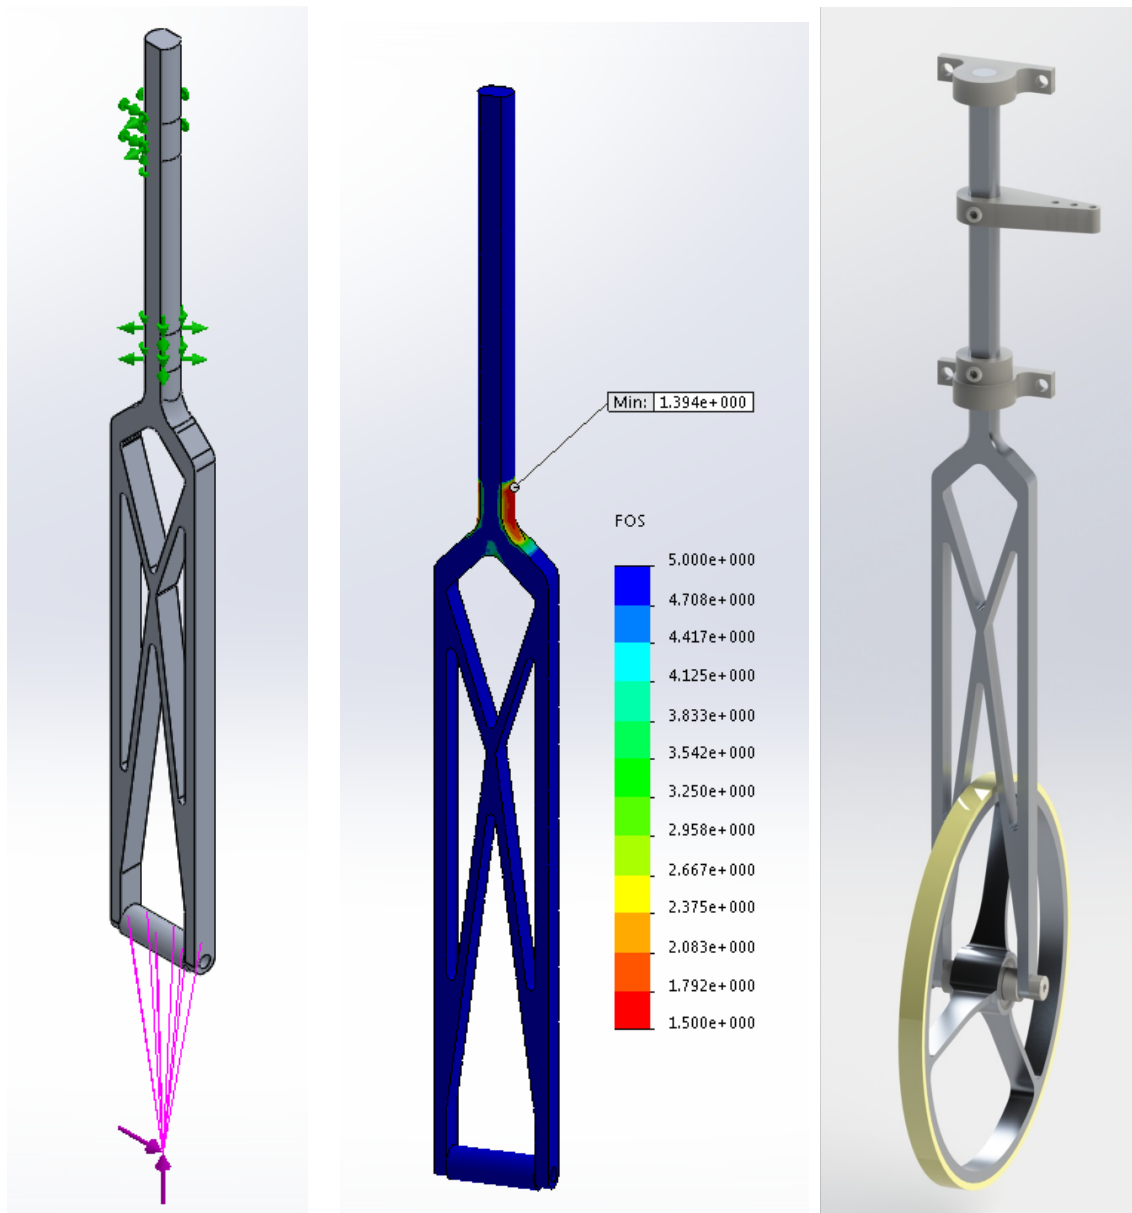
Welded aluminum solid link nose gear concepts
